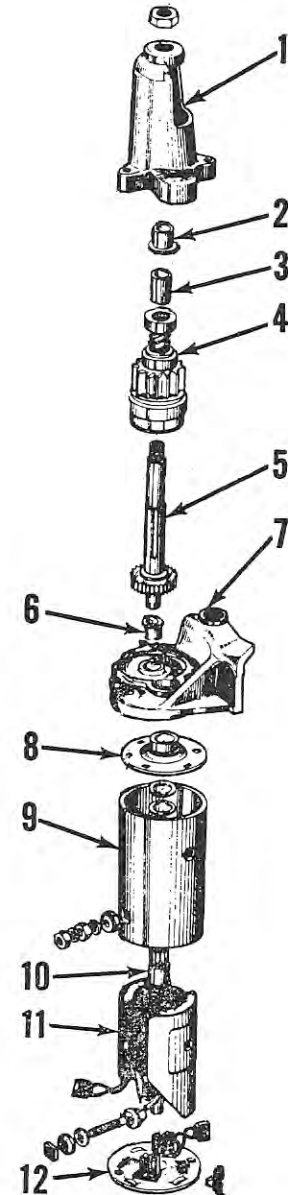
Exploded view of the gear reduction starting motor used on all 1962-1963 units.
